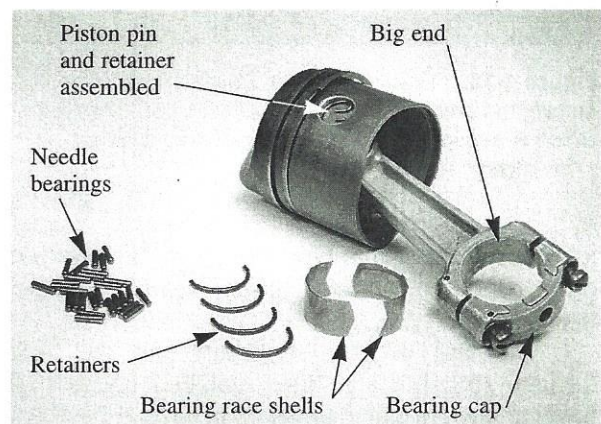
Big end of connecting rod is capped to fit around crankshaft journal. Needle bearings are inserted to help reduce friction. Piston pin and retainers are shown assembled. (Jacobsen Mfg. Co.)
